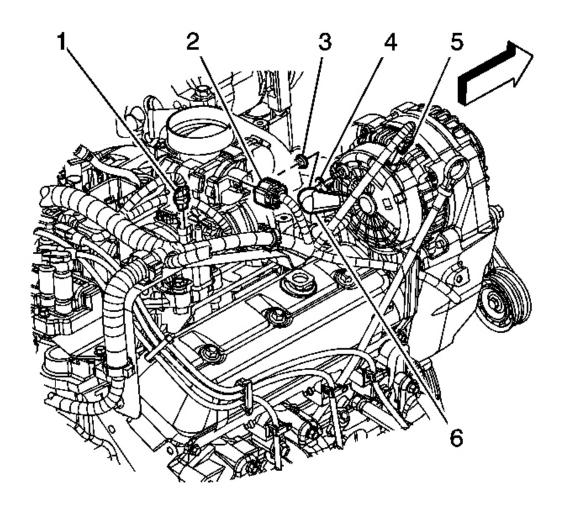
View Of Engine Wiring Harness & Components Courtesy of GENERAL MOTORS CORP.
